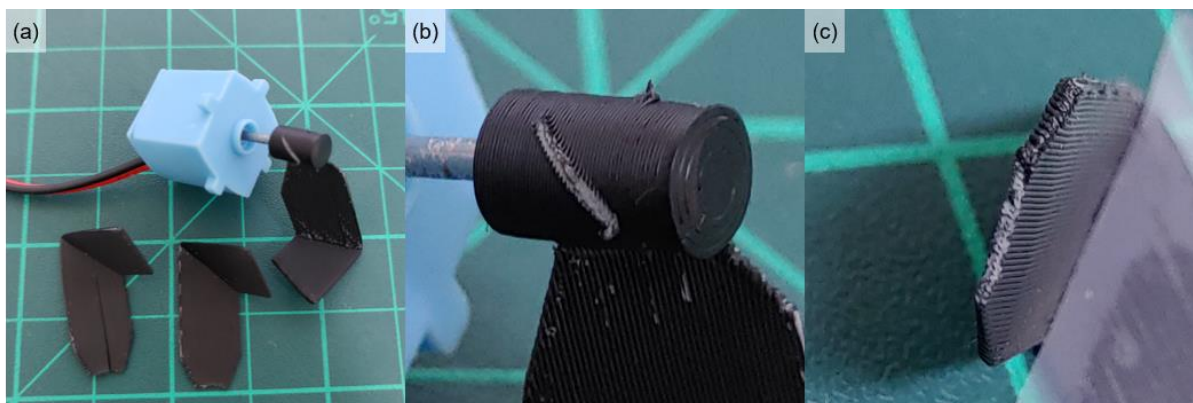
Fractured A105 rotor. (a) Rotor fractured at a wind speed around 25 m/s. (b) Fractured cross section of the hub. (c) Fractured cross section of the blade.
